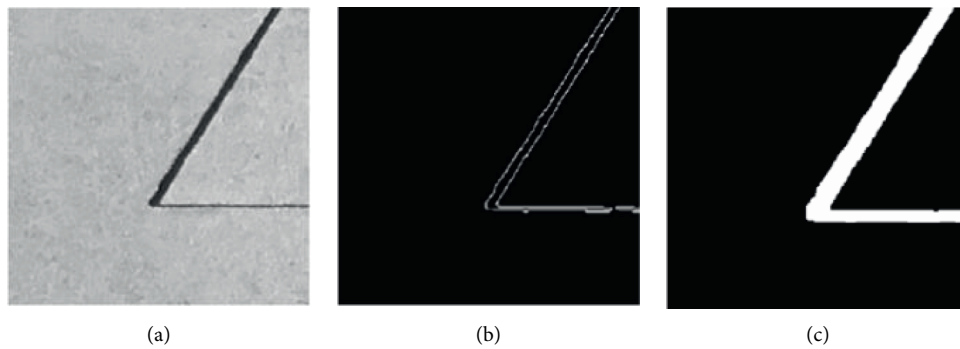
Broken line weld less than 90° . (a) Original image of weld. (b) Image of weld edge. (c) Image of weld trajectory.
